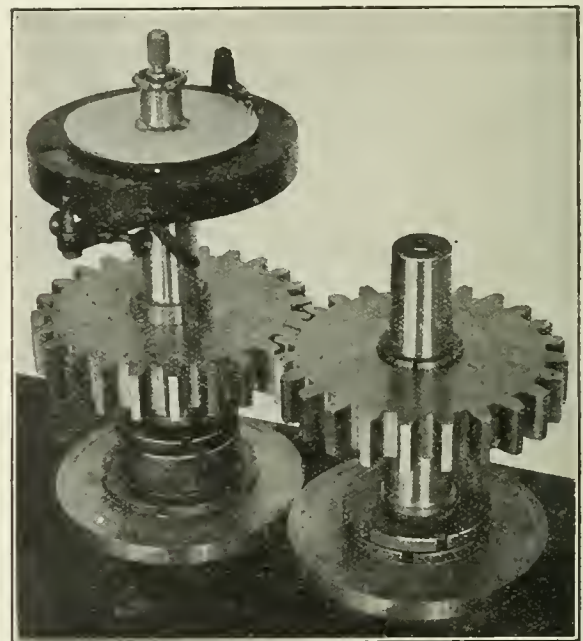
SAURER GEAR-TESTING MACHINE, SHOWING CHART BEING TRACED
